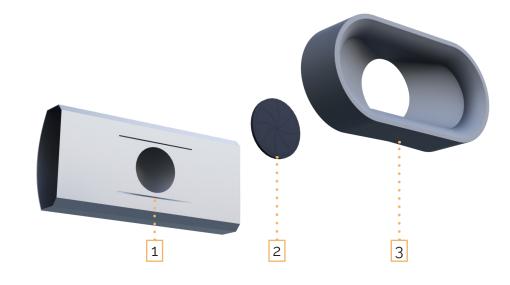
Exploded view of the exhaust valve with the most important elements labeled. [1] Duct with cutout, [2] Iris, [3] Main housing.
